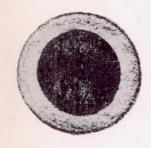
Spot welds from panels cleaned by chemical methods - D.C. welds.
